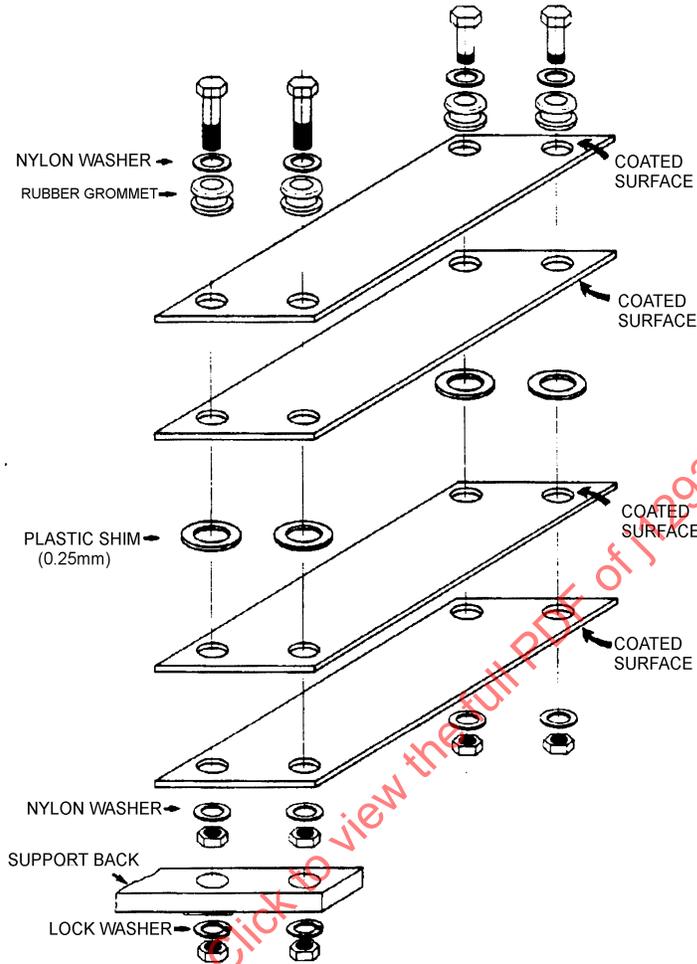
ONE-SIDED COATED STEELS COUPON ASSEMBLY
